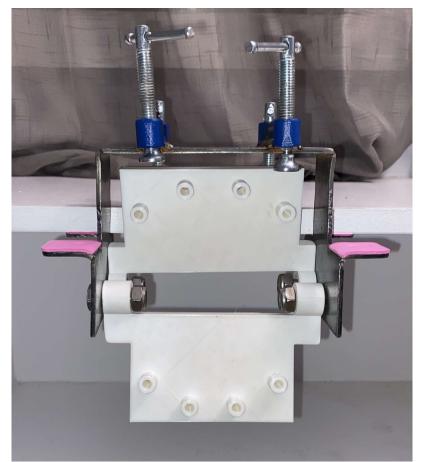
Front View clamped jig, 4.5 inch plate lowered, 5 inch preset in use.
